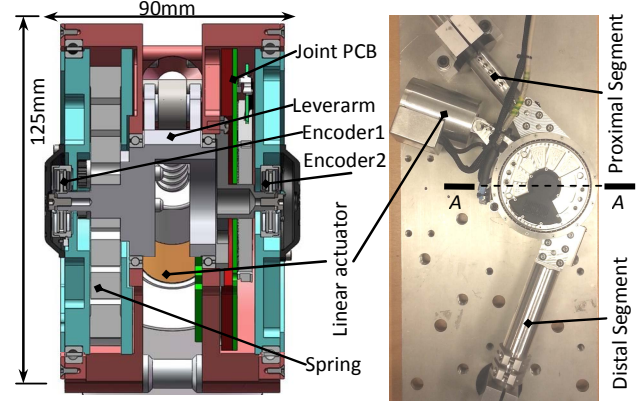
Left: A-A cross-section view of the joint shown on the Right: The joint has a sandwich structure, with the linear actuator and the leverarm in the center, to the left is the disk-shape spiral spring, to the right is the embedded joint PCB. Right: photo of the exoskeleton joint. In torque control tests, both proximal and distal segments were fixed to the big aluminum plate.
